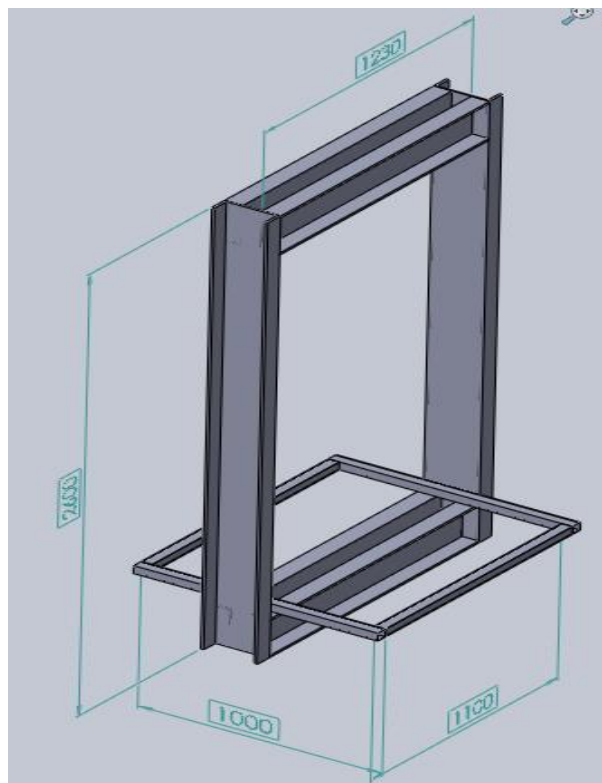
Some dimensions and modeling of solid C channel beam support elevator car frame
